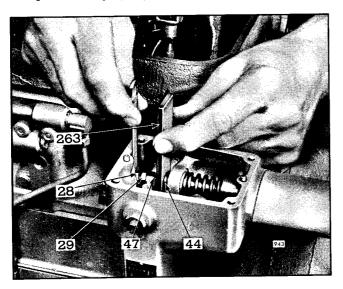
Adjusting Governor Gap – With Tool J 5407
